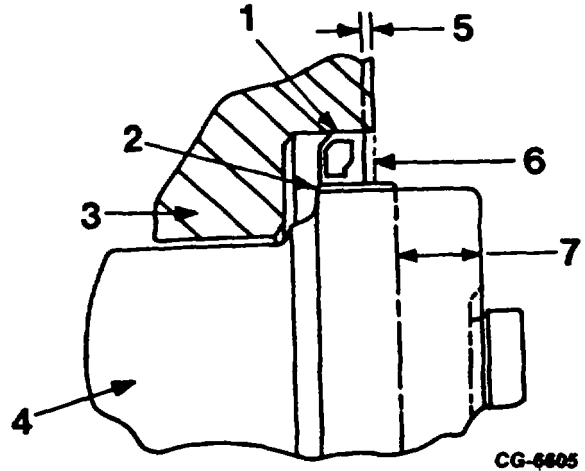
Sectional View Showing Proper Location of Wear Sleeve and Rear Oil Seal
